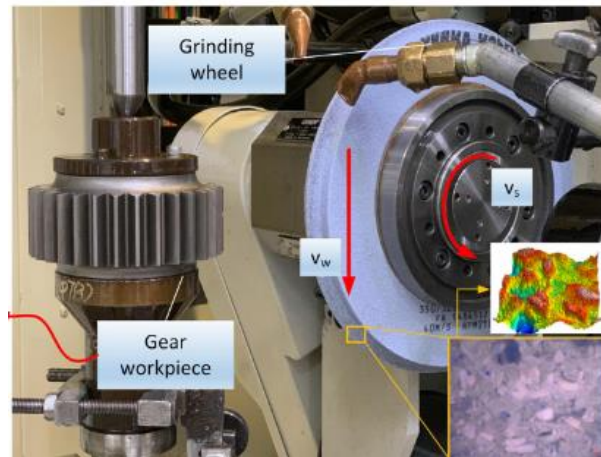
Profile grinding wheel and gear in grinding setup [7]
